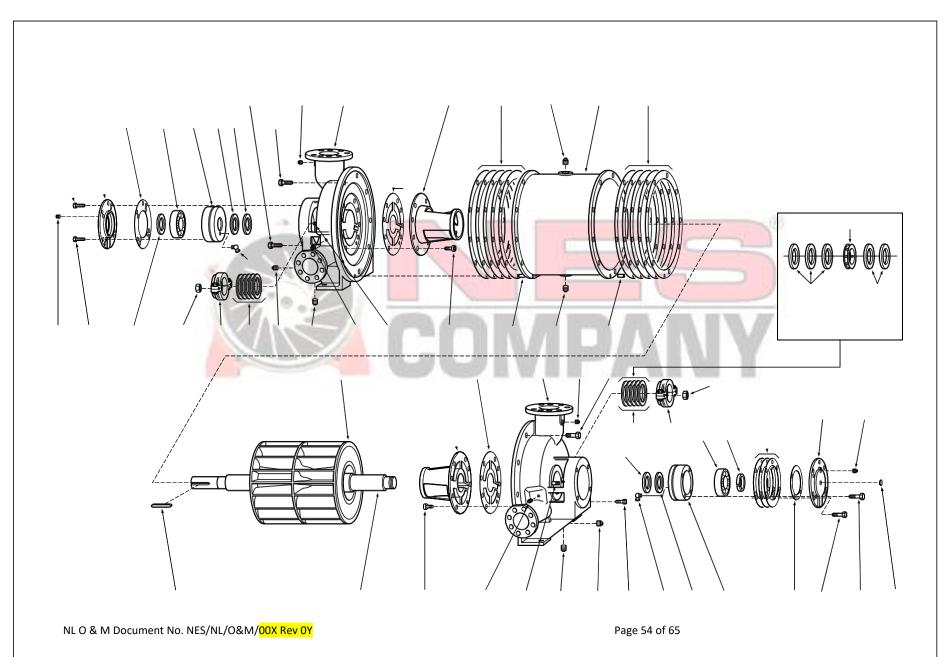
Exploded View of NES NL 1000 Vacuum Pumps.
